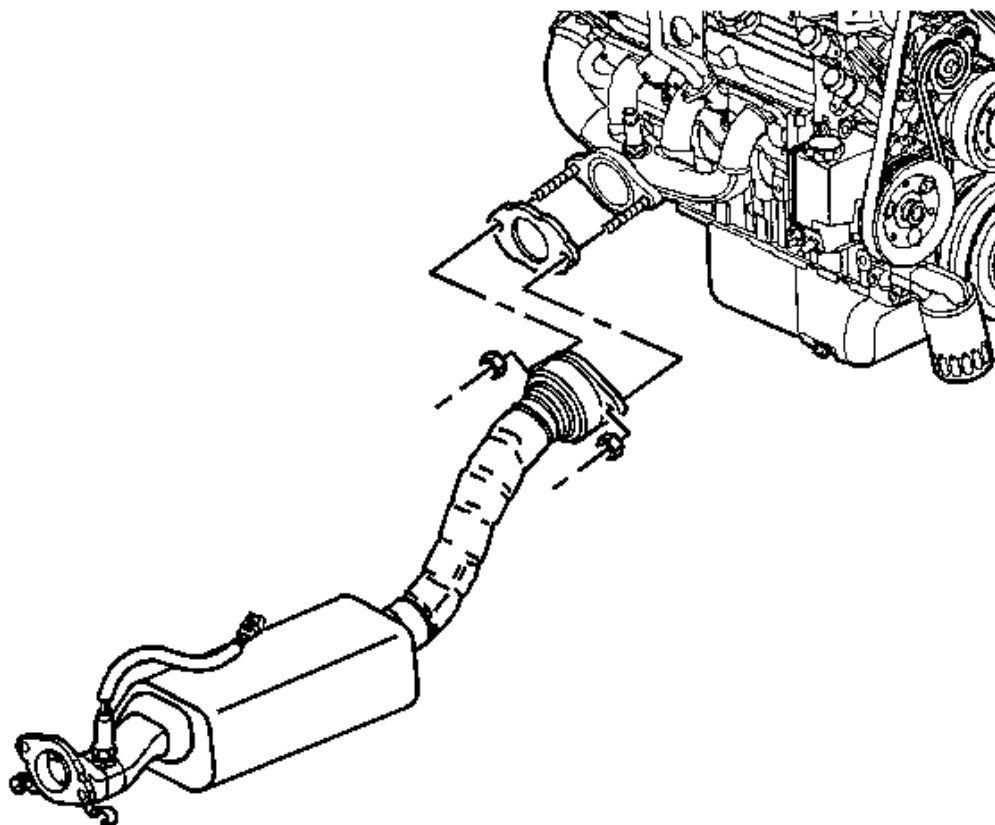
View Of Catalytic Converter & Exhaust Manifold Pipe Stud Nuts
